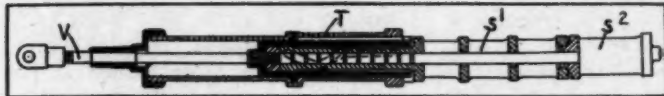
Forward gear shift for 3-speed hydraulic drive—The reverse shift is separate and designed on the same principle
